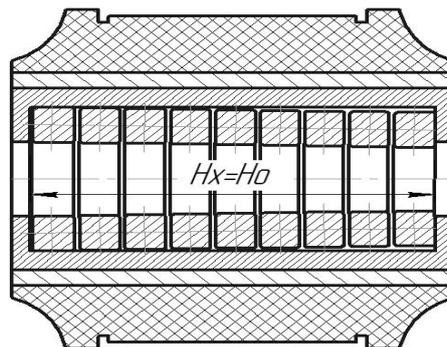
Schematic view of damper rubber bushing with movable conical box
